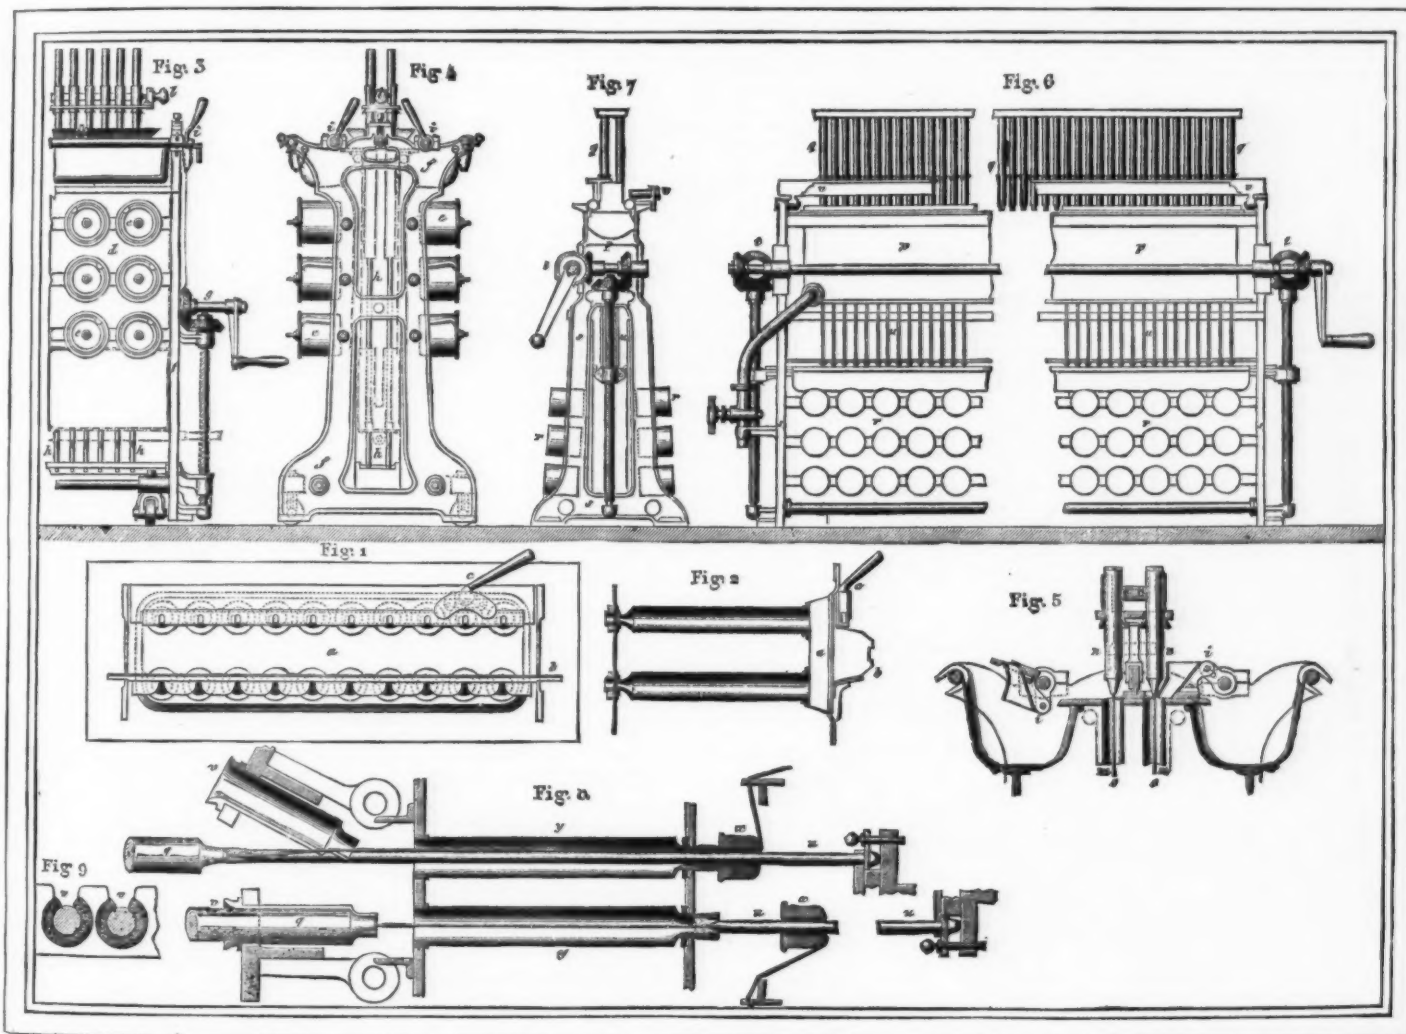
PLATE II.—MORANE'S CANDLE-MOULDING MACHINES
